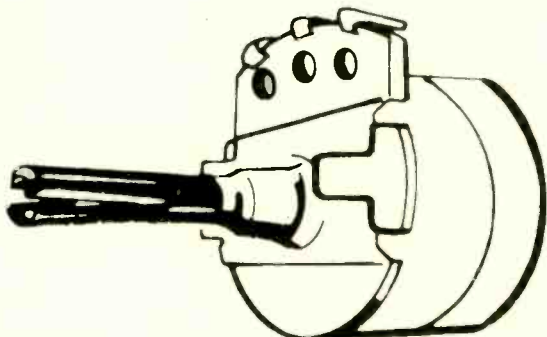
Replace with Part No. 22A009-3 (T925-03 chassis) and Part No. 22A010-17 (T925-04 and later chassis).
